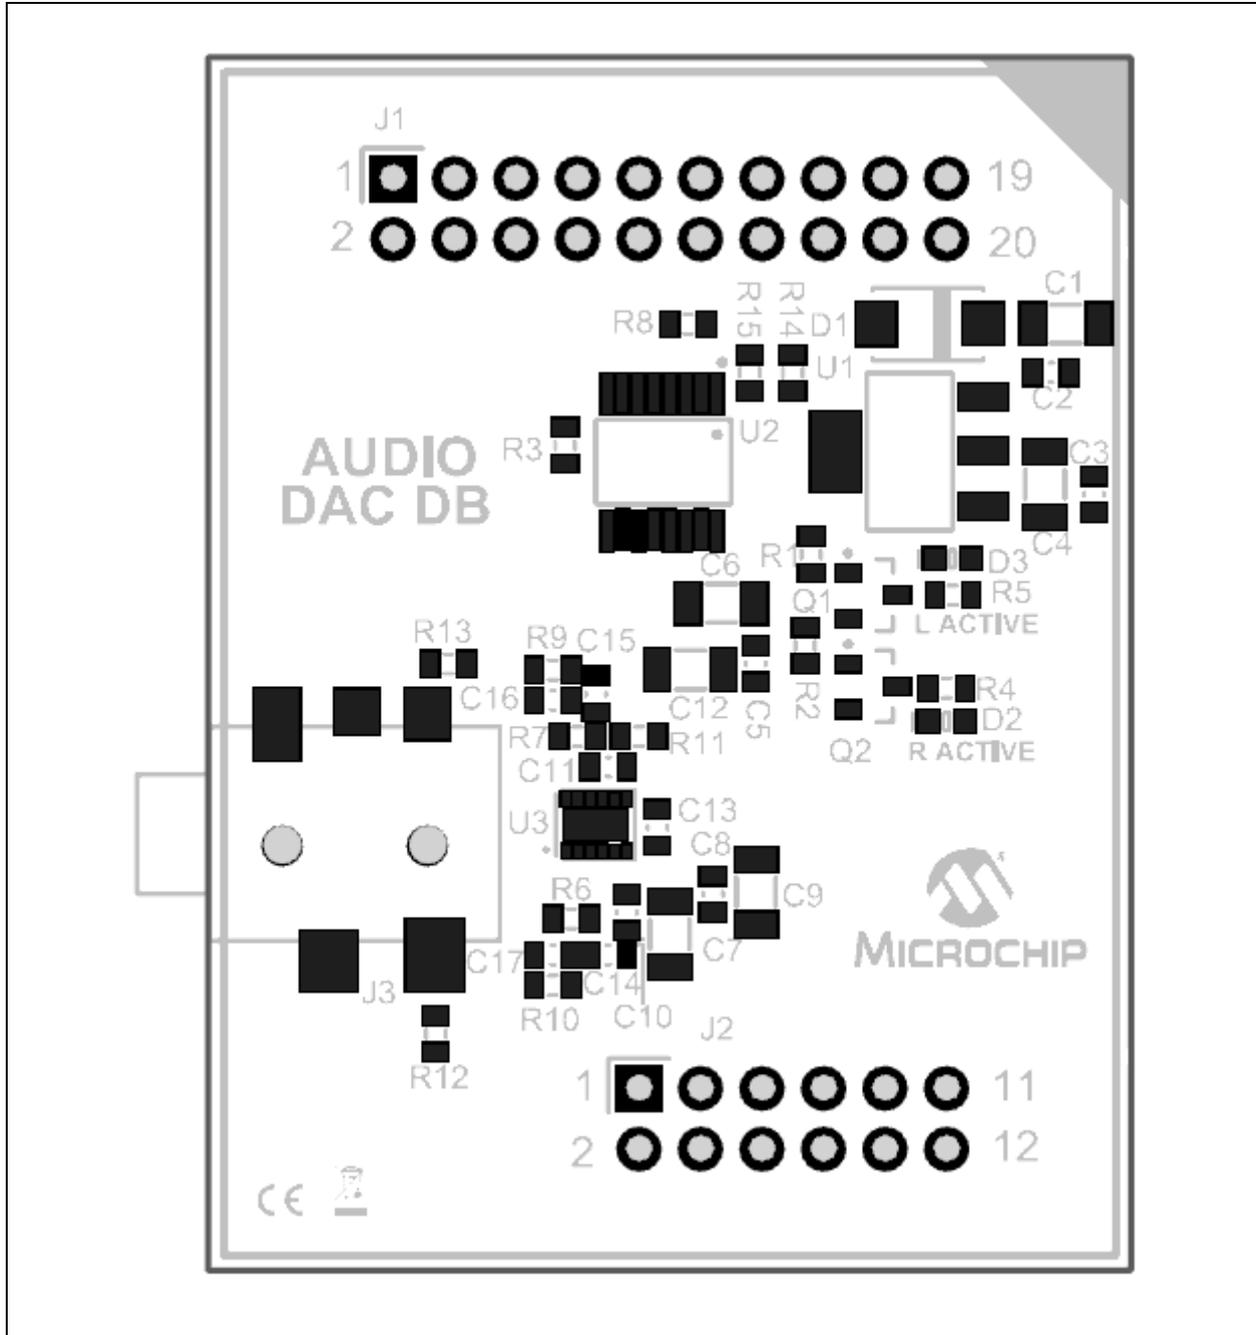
AUDIO DAC/AMP DAUGHTER BOARD LAYOUT (TOP ASSEMBLY)
